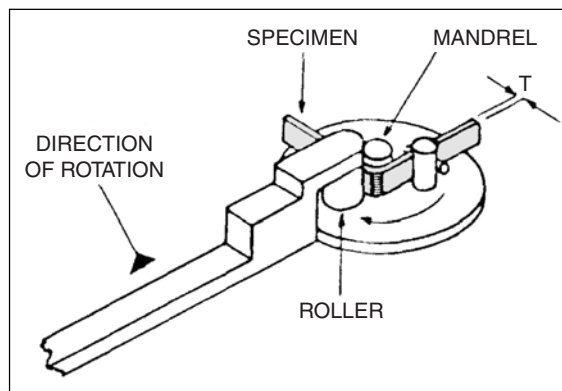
B—Basic Design of a Wraparound Testing Jig
